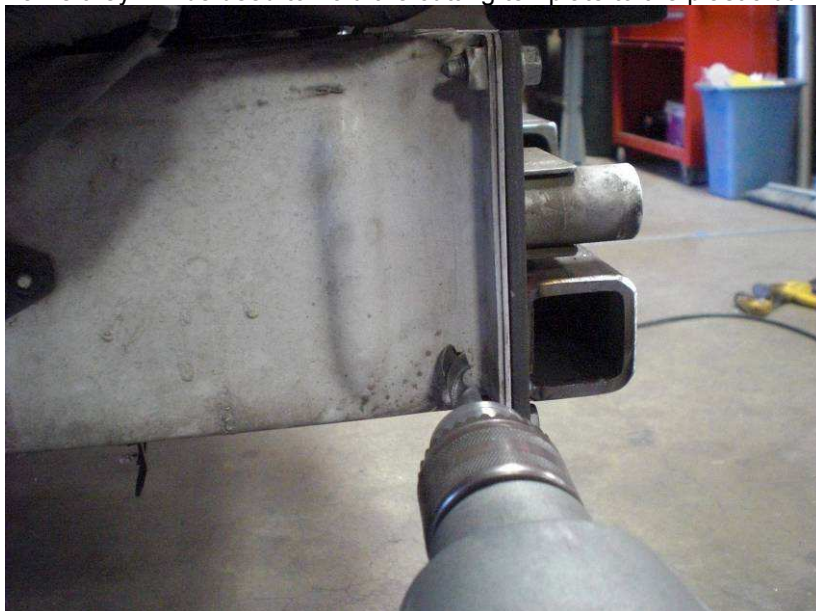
Drill 2 equally spaced $3/8$ " Holes through the frame and angle brackets
